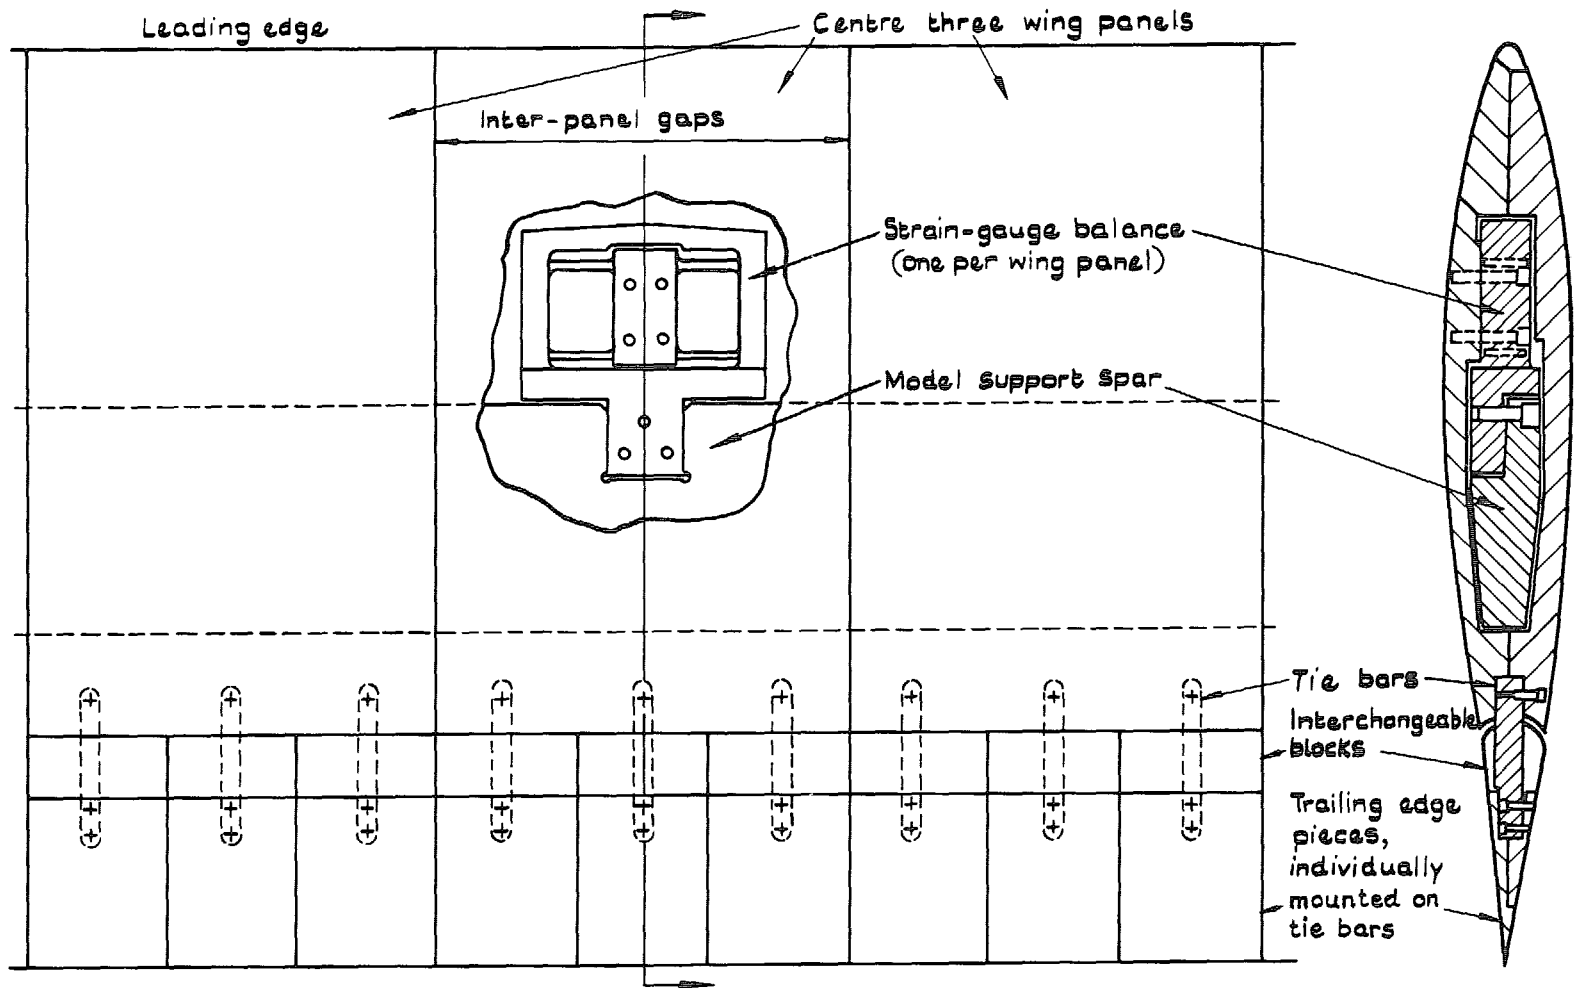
Model arrangement for trailing edge gap configurations tested on Section 2815.
